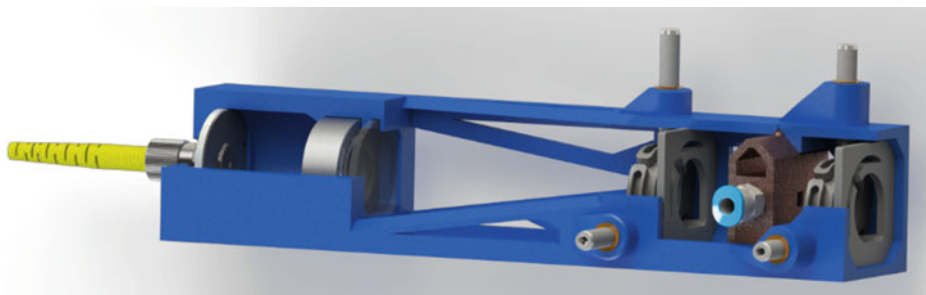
CAD model of the additively manufactured optomechanic for a laser system
